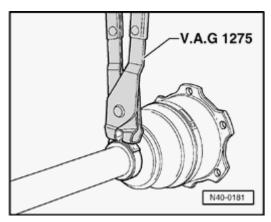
Tightening Clamp With Hose Clamp Pliers V.A.G 1275 Courtesy of VOLKSWAGEN UNITED STATES, INC.
